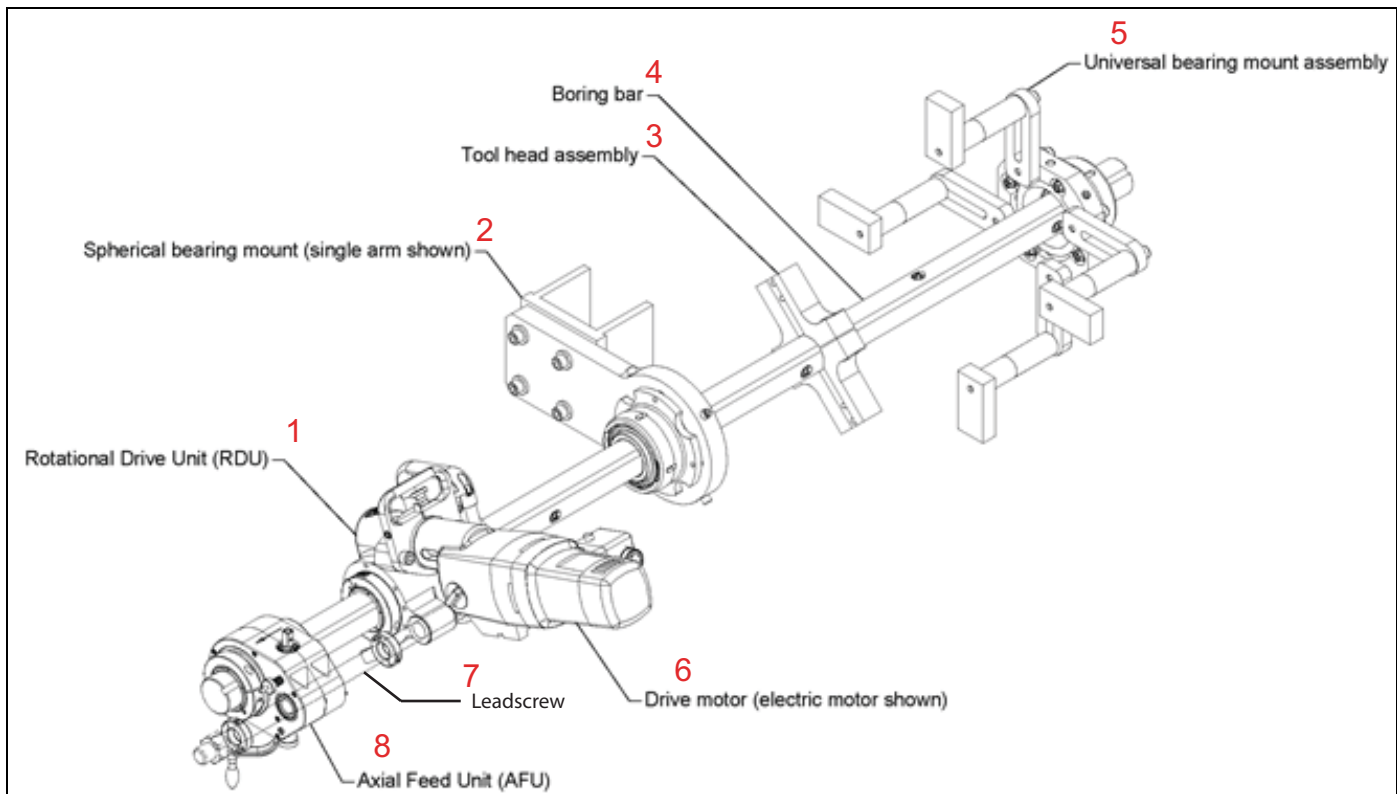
BB4500-BB5000 COMPONENTS WITH EIBENSTOCK MOTOR (BB5000 SHOWN)
